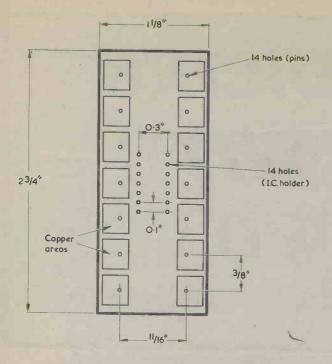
The copper pattern and holes required in the printed circuit board employed for the adaptor
